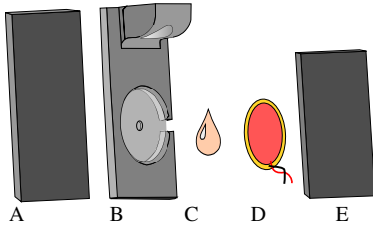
Exploded view of *SonicFinger*, (A) Foam 1, (B) 3D printed finger, (C) Adhesive, (D) Piezoelectric transducer, (E) Foam 2.
